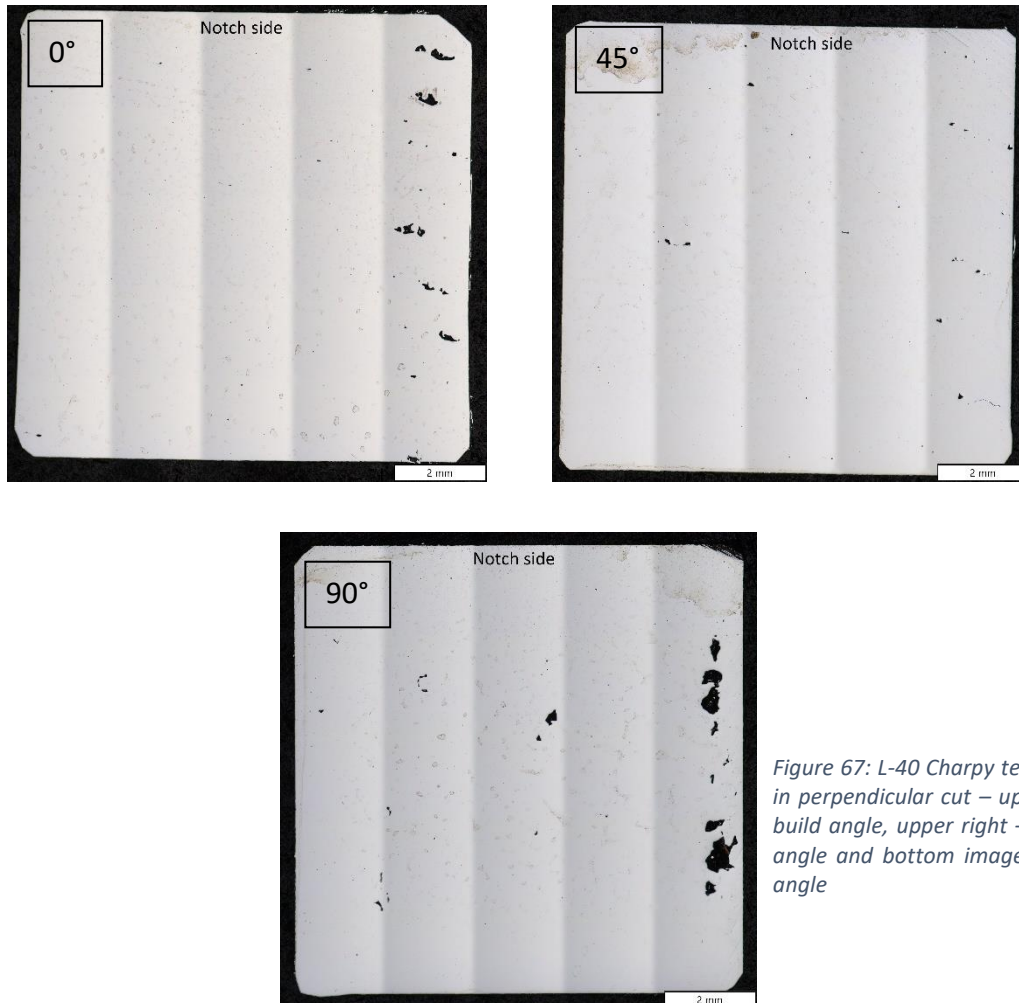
L-40 Charpy test samples in perpendicular cut – upper left 0° build angle, upper right – 45° build angle and bottom image 90° build angle
